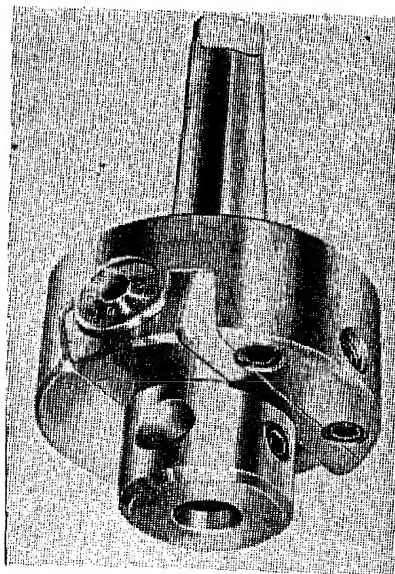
An adjustable offset boring head. (Courtesy Flynn Manufacturing Co.)
